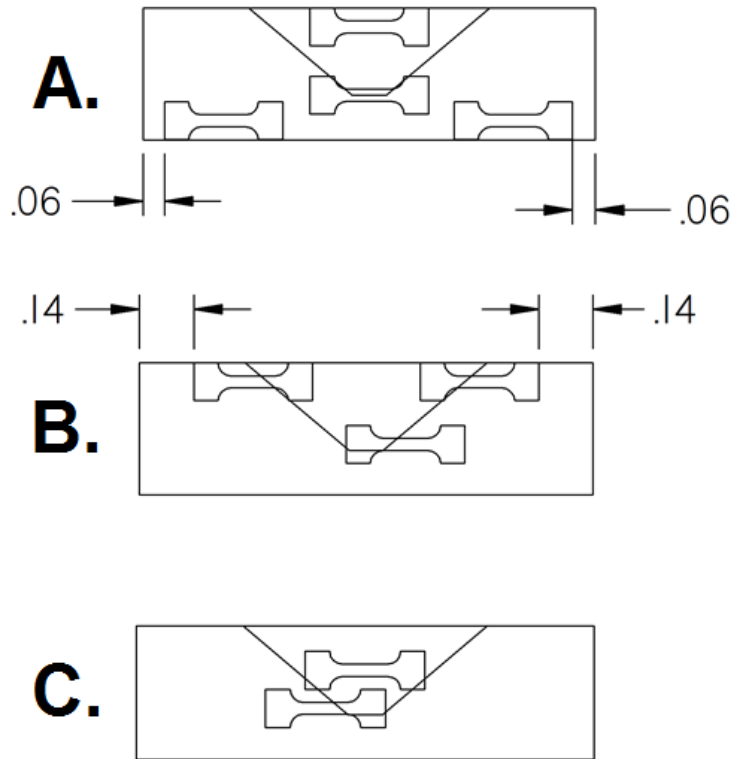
A. Base Metal (bottom left and right), Weld Specimen (top middle), HAZ Specimen (bottom middle); B. Three HAZ Specimens; C. Weld Specimen (top middle), HAZ Specimen (bottom left); Dimensions are in inches.
